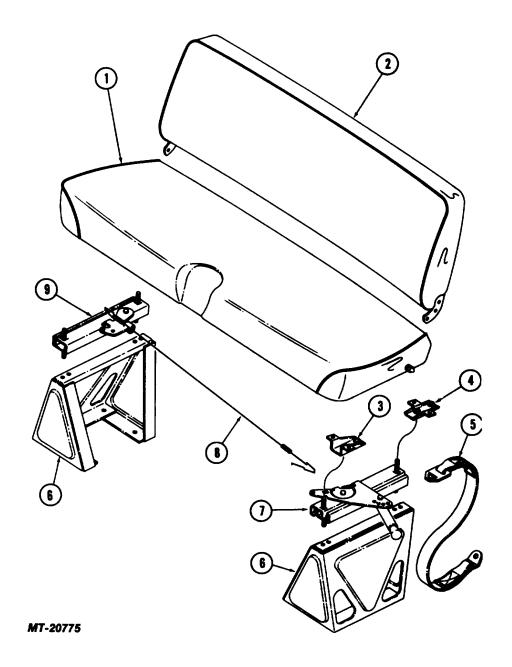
Full Width Bench Seat - Standard Trim - Exploded View
